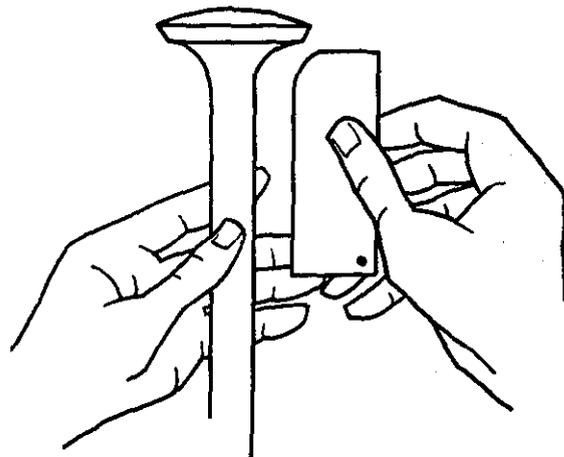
Checking valve stretch with a manufacturer's gage.
